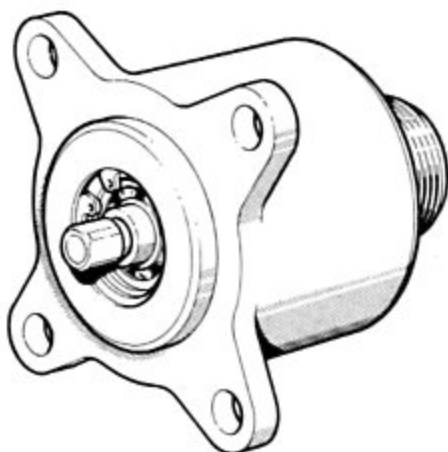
Tachometer generator, Type 2701 KGA/CP/1
